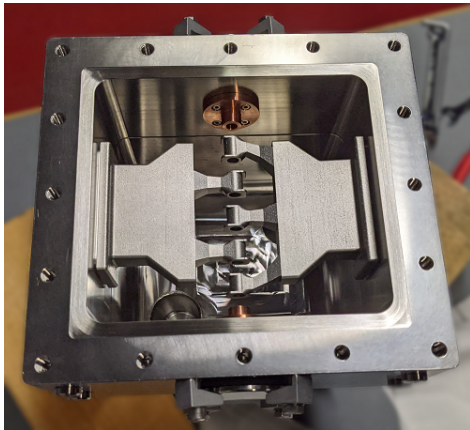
Top view of the cavity during first assembly with installed drift tube structure.
